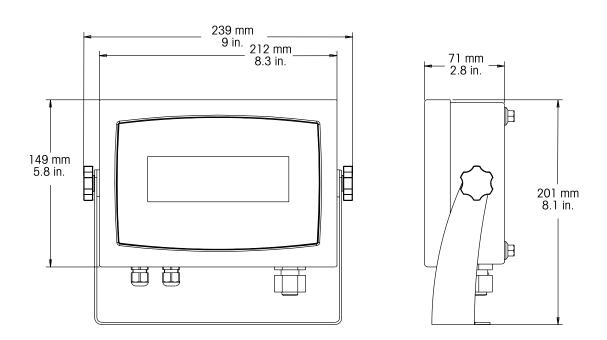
T31XW Indicator Overall Dimensions with Mounting Bracket.
